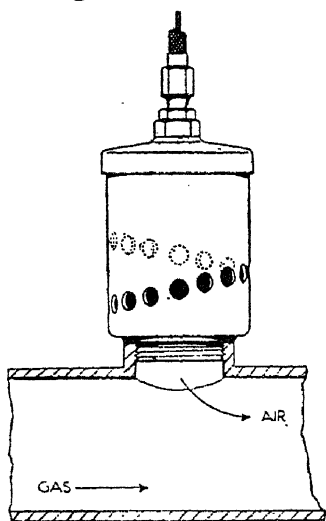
Bowden Extra Air Control for Coal and Producer Gas Automobile Engines.
